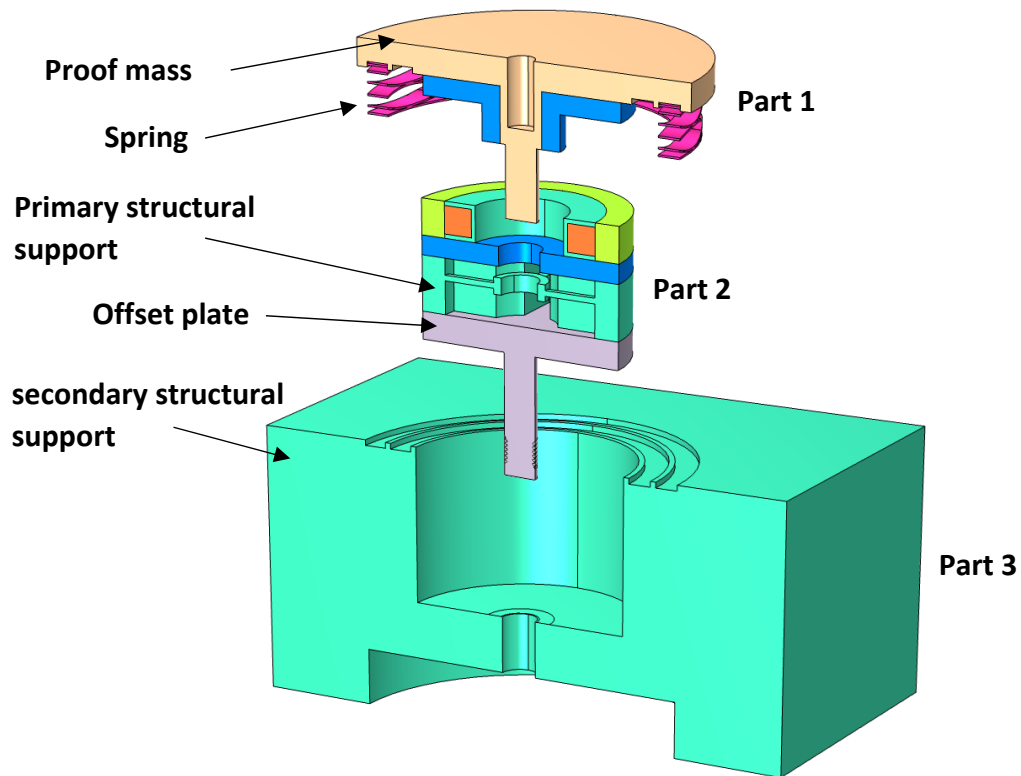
Exploded diagram of prototype. Top: Part 1 consisting of proof mass, spring and core component. Middle: Part 2 consisting of magnet, coil, core component, offset plate and support structure. Bottom: Part 3 is used as support structure.
